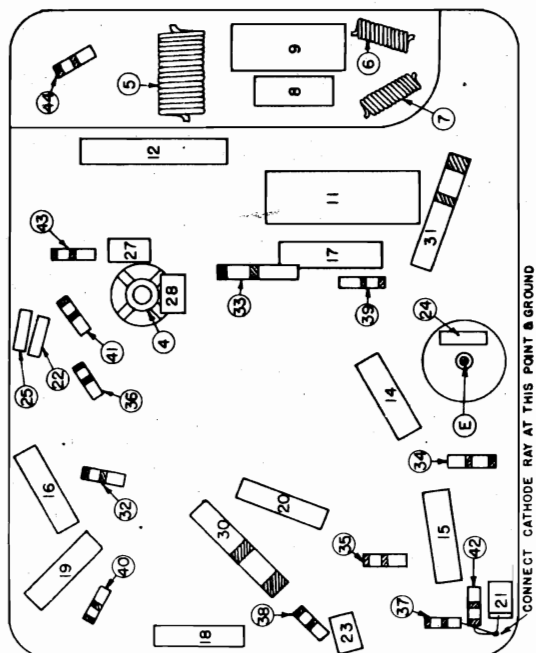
PARTS LAYOUT--DASH UNIT--Bottom View
